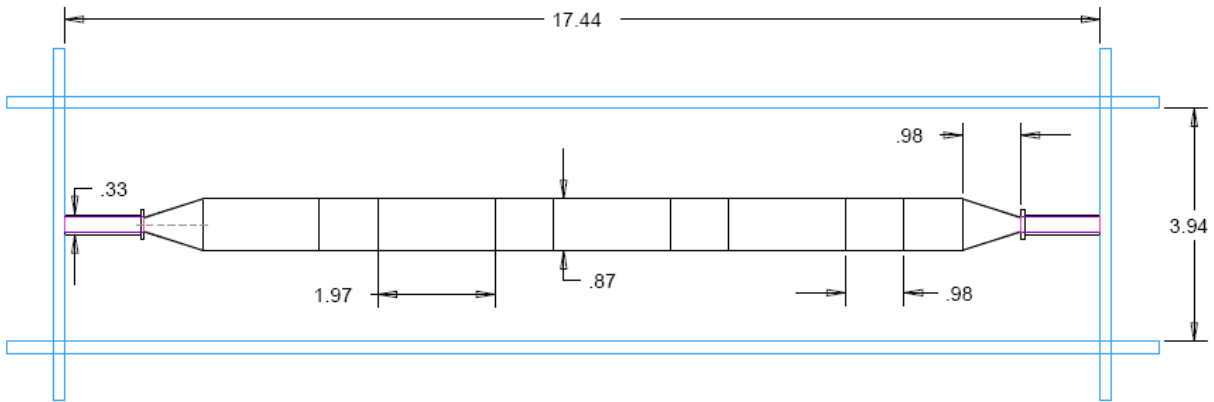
Top view of the mould used for upper section, designed in Pro Engineer. Dimensions are expressed in inches.
